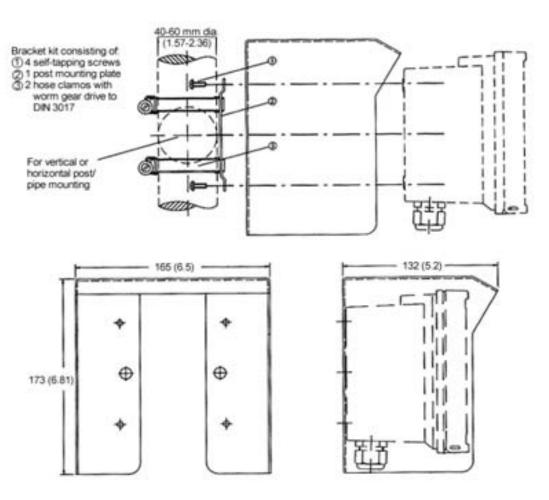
Dimension Drawing for APT2000 with Wall or Pipe Mounting
